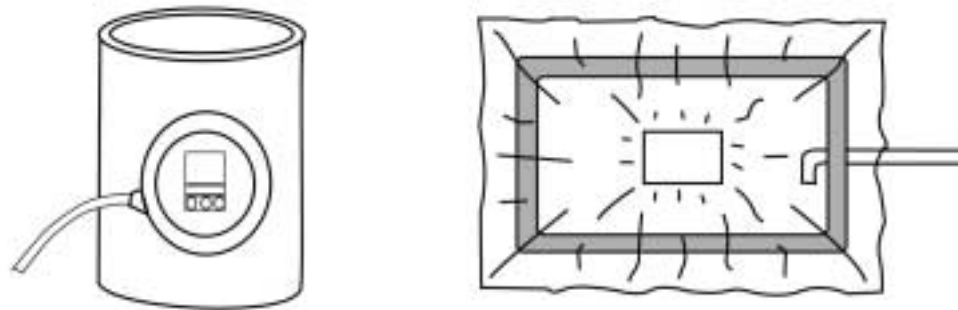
Two vacuum clamping techniques. Left: commercially-available vacuum pads
